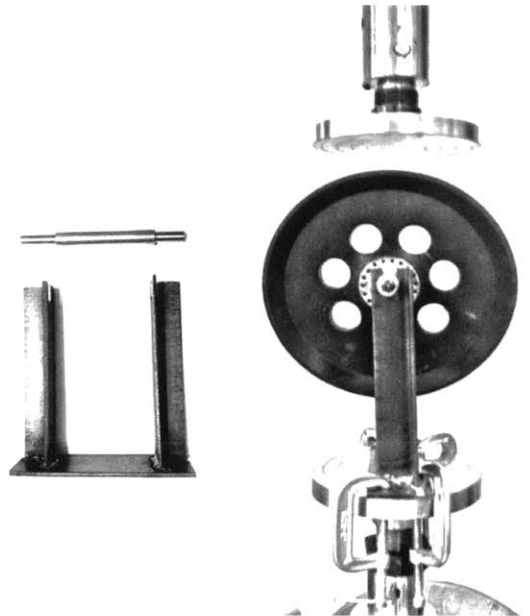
Fabricated fixture and axle for Instron compression testing and when clamped to the Instron.
